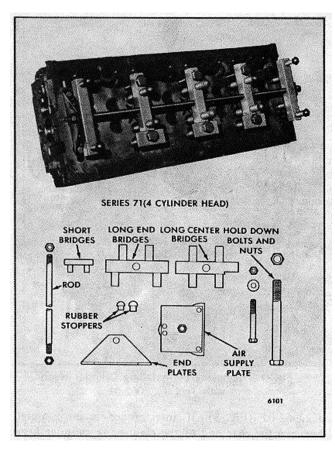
Cylinder Head Prepared for Pressure Testing using Tool J 28454
